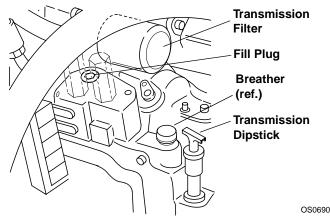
Fill the transmission through the fill plug or dipstick opening.
